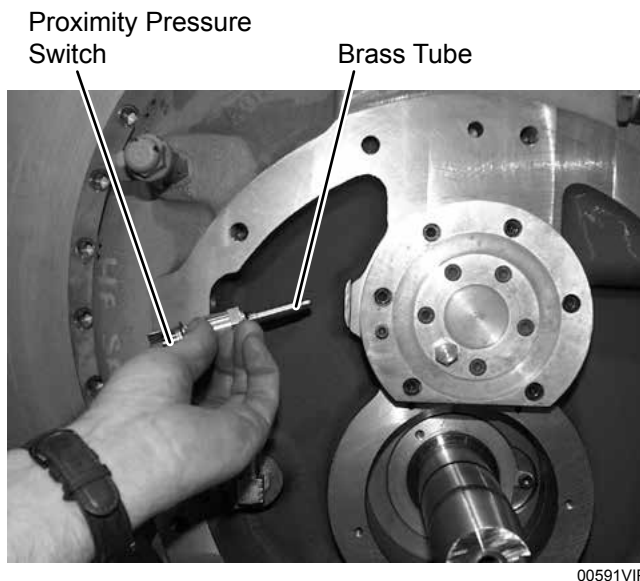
HIGH-SPEED BEARING COMPONENTS - REAR (HD & HF COMPRESSORS)
